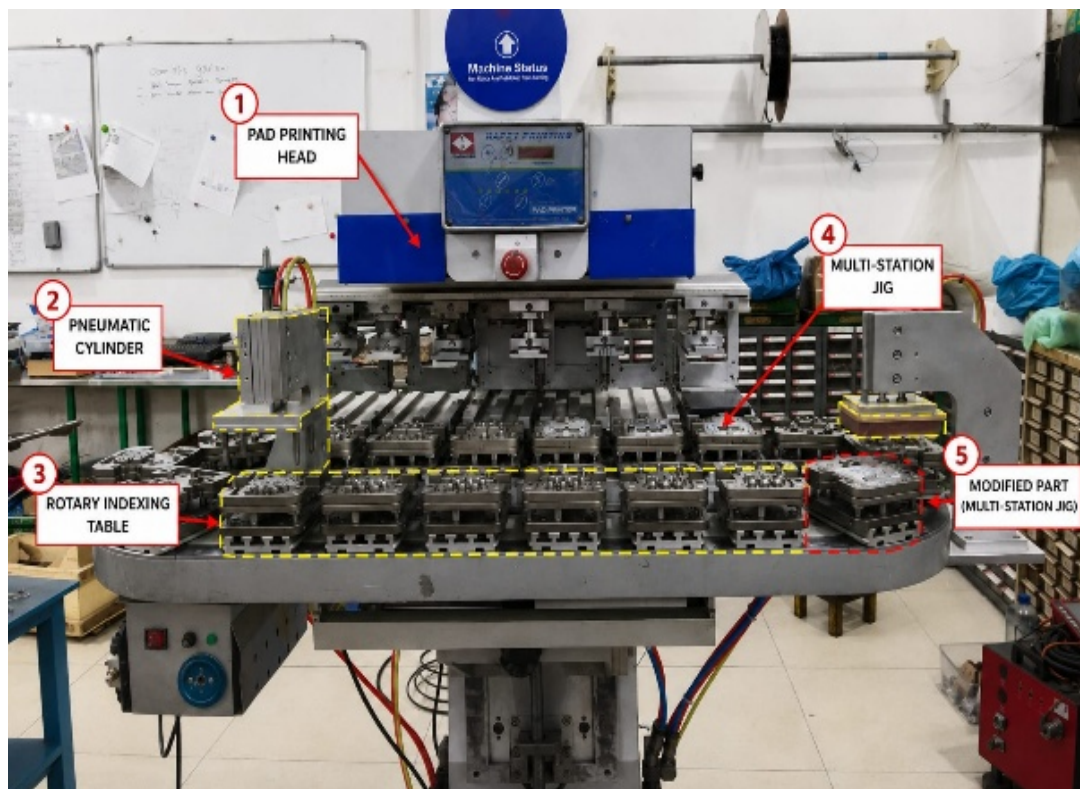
Configuration of the industrial pad printing machine setup at PT RPS Precision Engineering.
